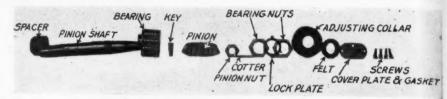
The Pinion Shaft Disassembled and Parts Arranged in Order of Assembly From Left to Right. Other Components of Pinion Flange Housing Are Shown in Order of Reassembly (Left to Right) at Right of Cotter Pin
